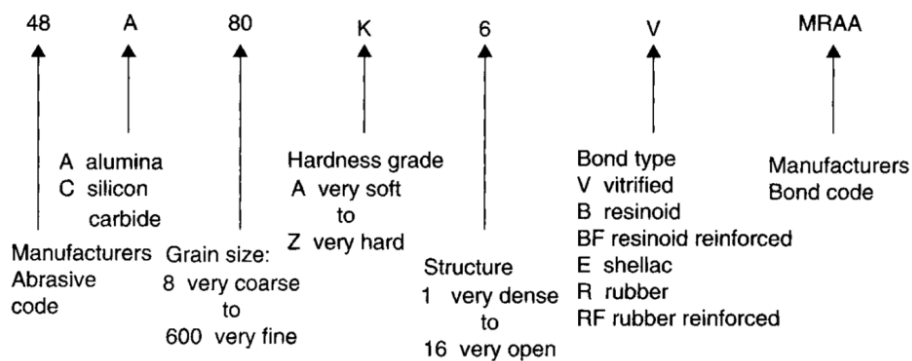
WHEEL CODING FORMAT FOR CONVENTIONAL ABRASIVE GRINDING WHEELS [6].
